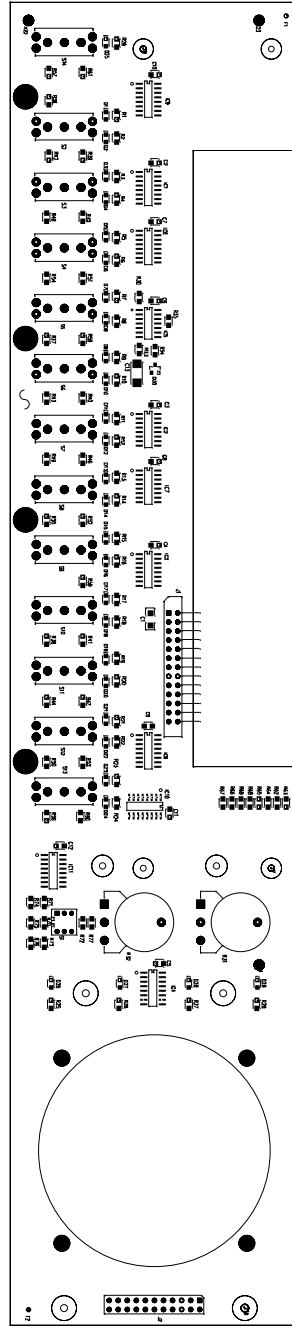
Assembly Drawing—ICS-2003 Front Panel PCB Rev. B
